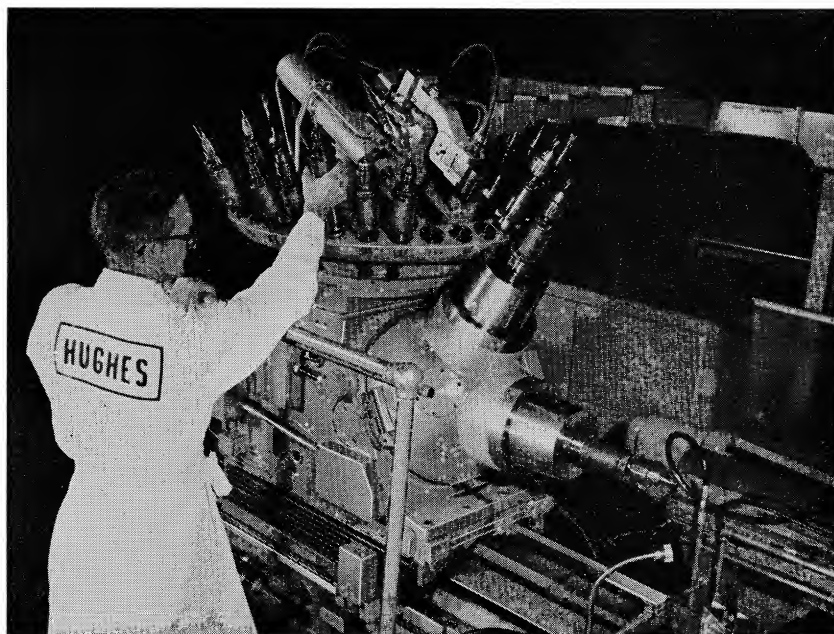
The universal head is equipped with a double-spindle turret and a thirty-tool capacity changer. While one spindle is operating, the cutter in the idle spindle is changed for subsequent use in the machining cycle.
